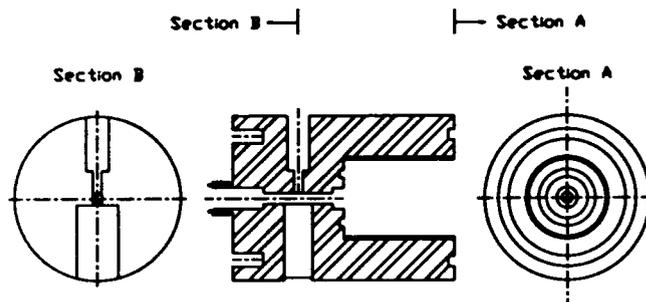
Scaled Drawing of the Bosch injector mount (outermost diameter is 76.2 mm).
